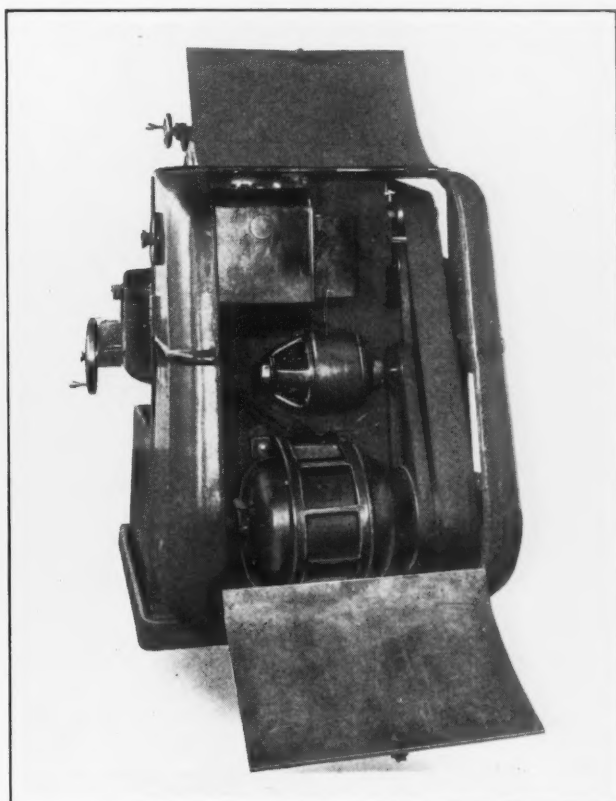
Manner of installing most of the Electrical Equipment in the Machine
